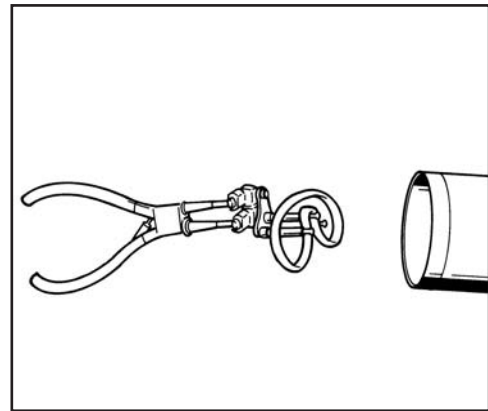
INSTALLING CONTROL SLEEVE SEAL
